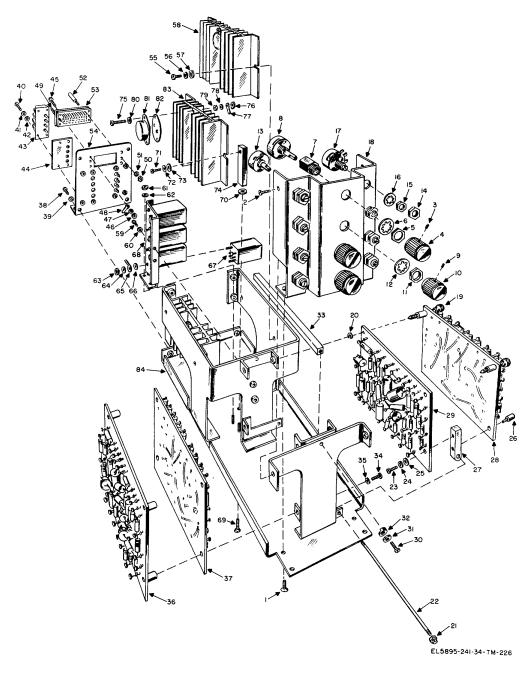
Amplifier Assembly AM-2827/FSW-8 (part of OA-2055/FSW-8), exploded view.
